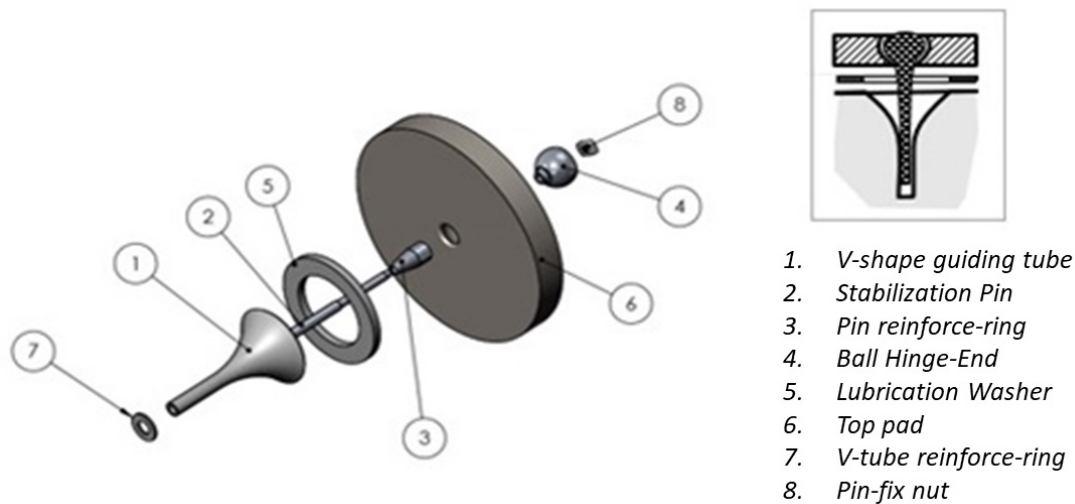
CAD assembly for the basic design drawing of a HP V-connector's metal parts
